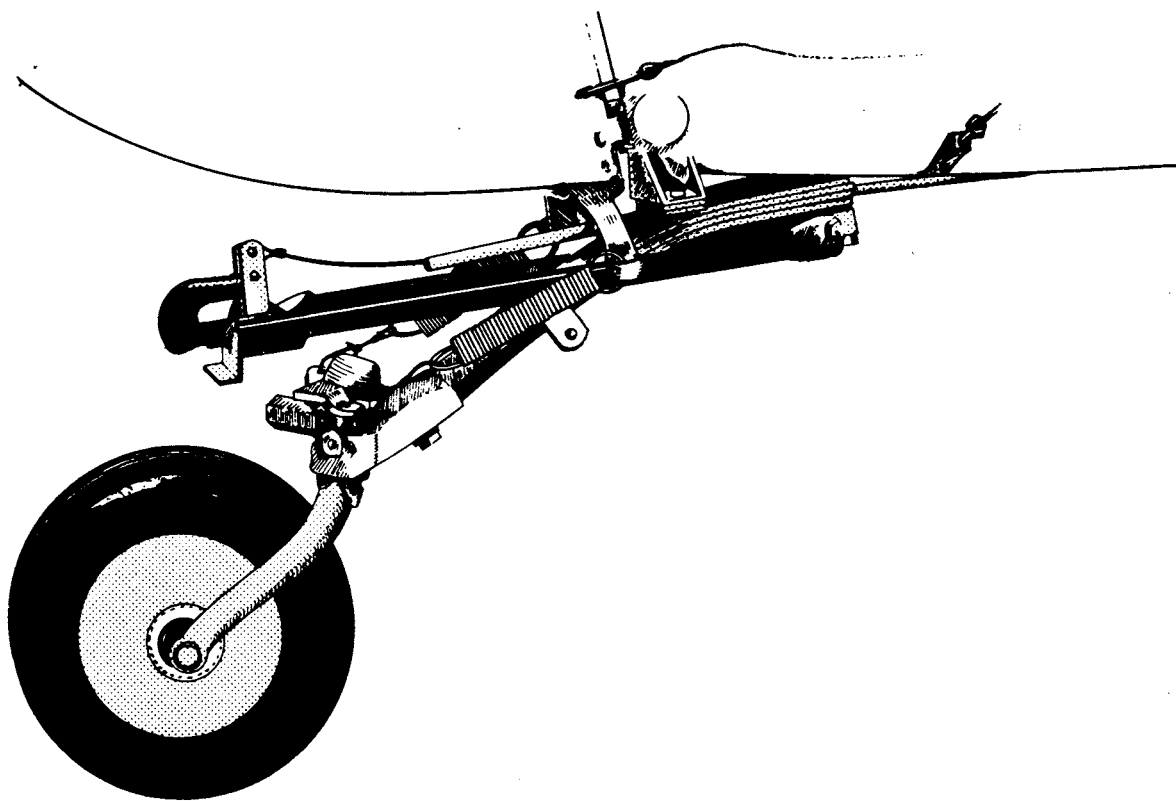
Conventional gear aircraft—leaf spring type tailwheel.
